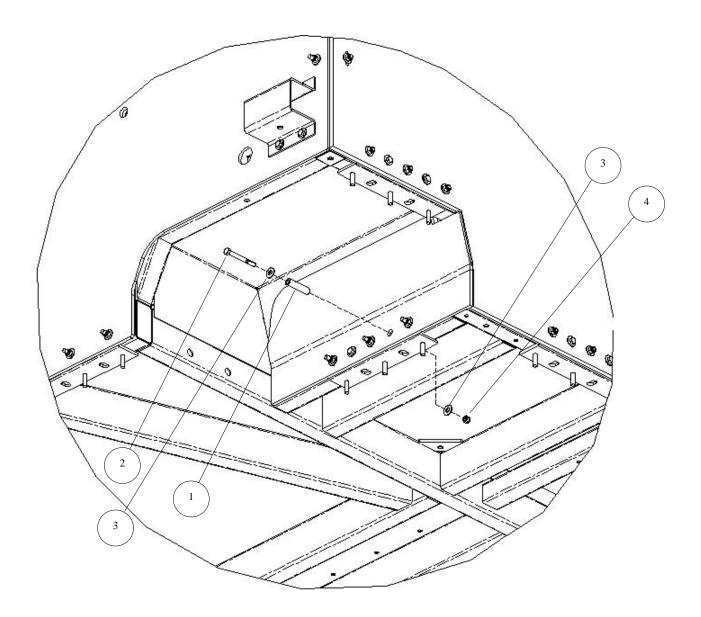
Cab Frame Rail Sleeve Bushings Installation.
